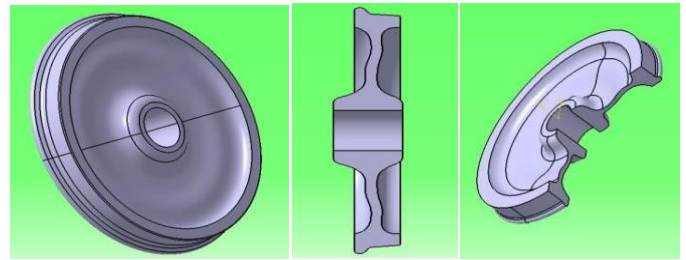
3D Model and Cross-section of the S-Shape Railway wheel
